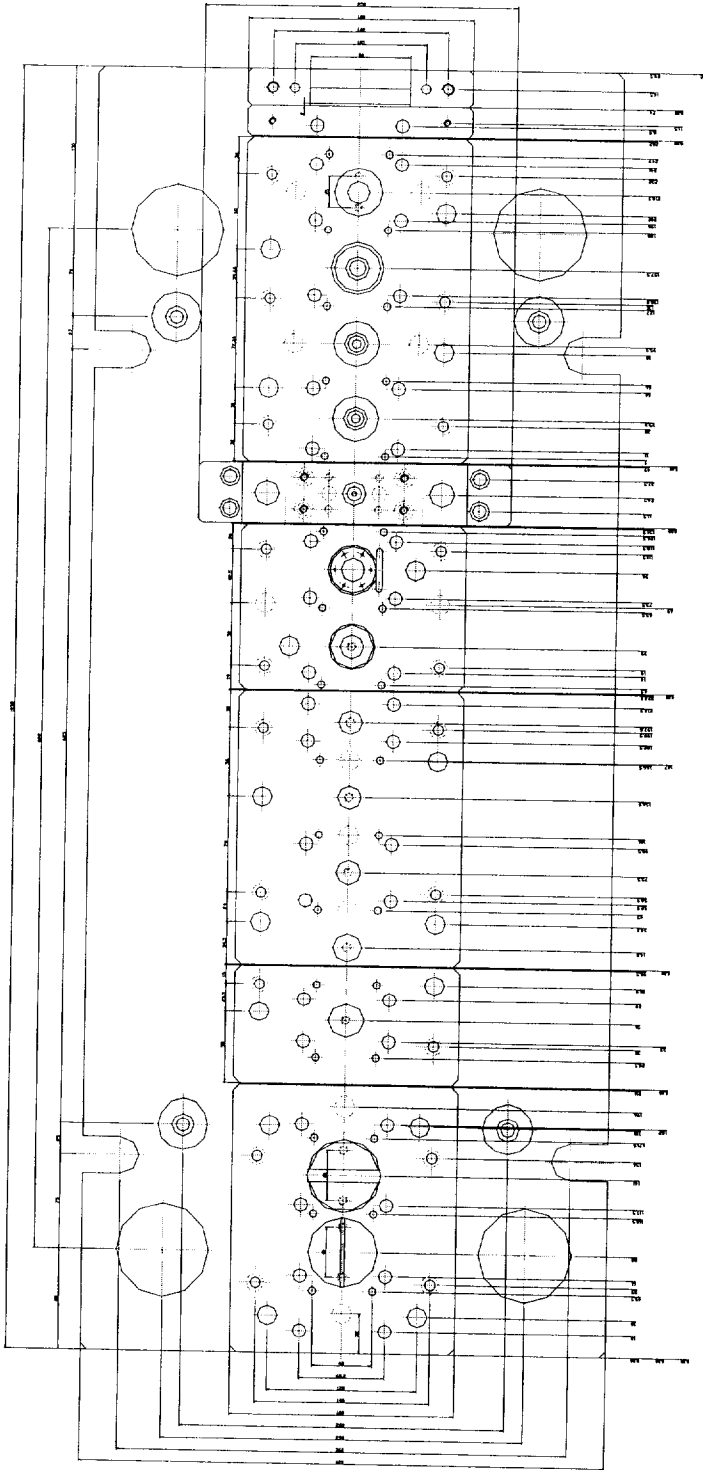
Summary assembling drawing of the die design on top view "A-A" of Fig.18
